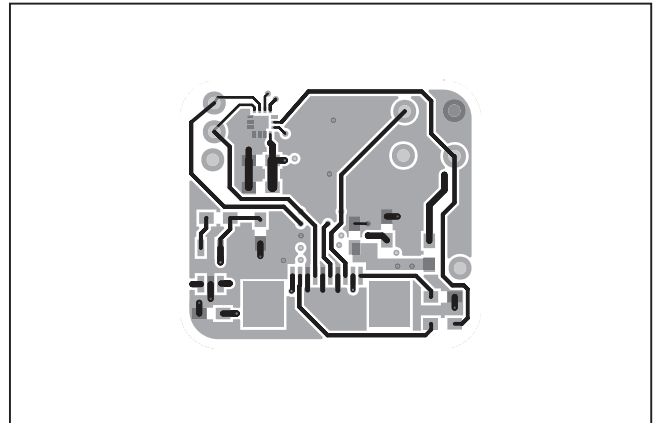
MAX30102 Daughter Board PCB Layout—Layer 2
